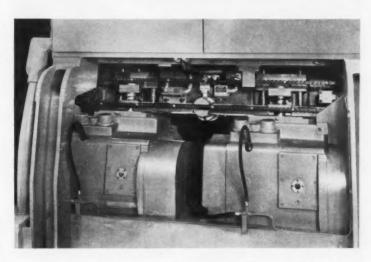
Rear view of two-station external gear deburring machine showing automation equipment
